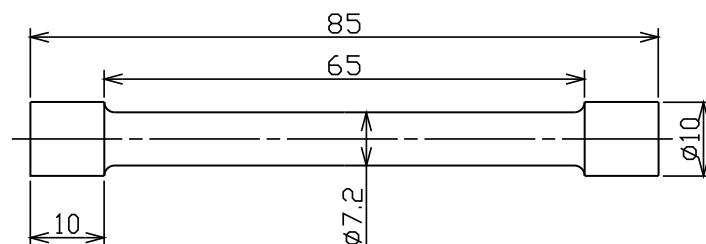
Scheme of the smooth specimen (ASTM D638-91 and D2990, all dimensions in mm).
